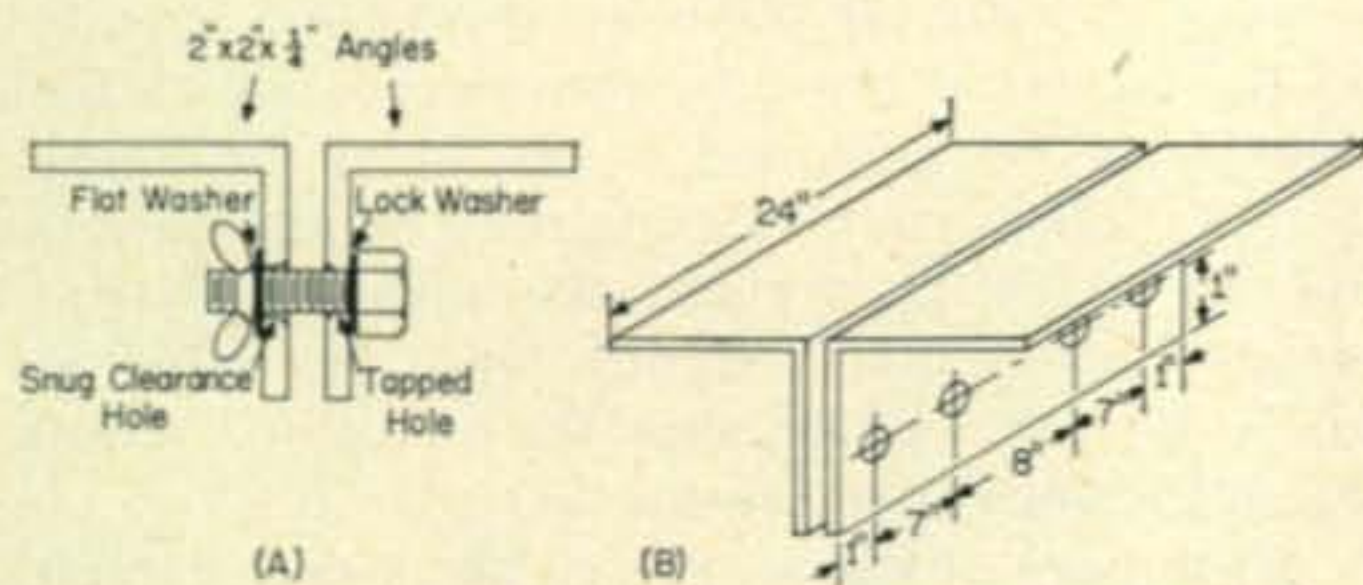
Fabrication of brake angles. Large capped screws together with hex or wing nuts are used to tightly draw together the angles when they are clamped around the material to be bent. Referring to (B), holes should be drilled through the two pieces of angle while they are aligned and clamped together with C-clamps. The drill size for the desired tap should be used first. The two angles should then be separated and the holes in one piece tapped as needed and the holes in the other piece enlarged to provide a snug clearance for the screw, as shown at (A). This procedure will ensure perfect alignment during bending operations. The edges of the holes on the inner faces of the angles should be slightly countersunk.
